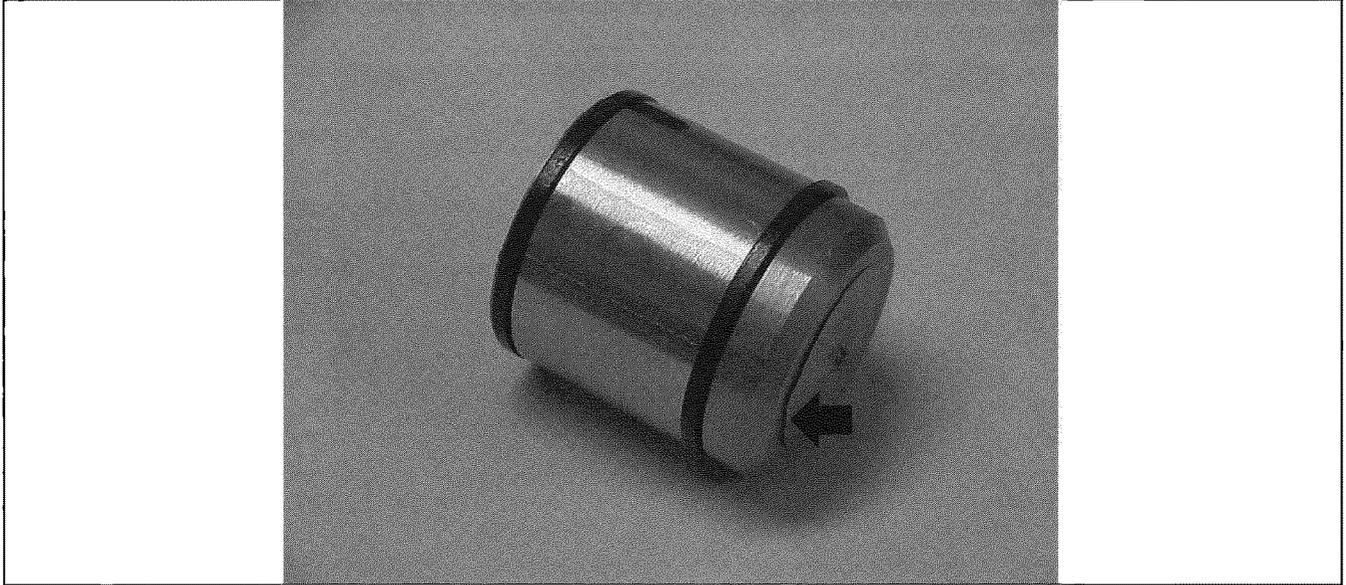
Cracked Wall in Mis-machined Piston
